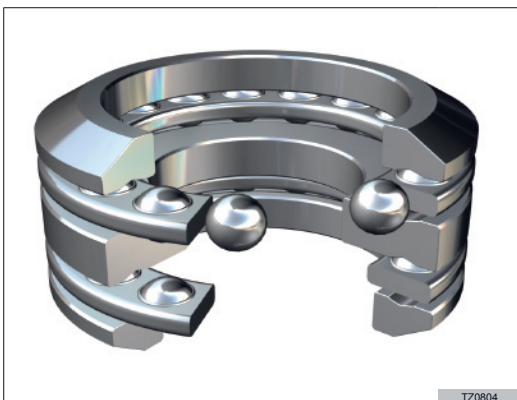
Double-row double-direction thrust ball bearing with spherical outer rings
